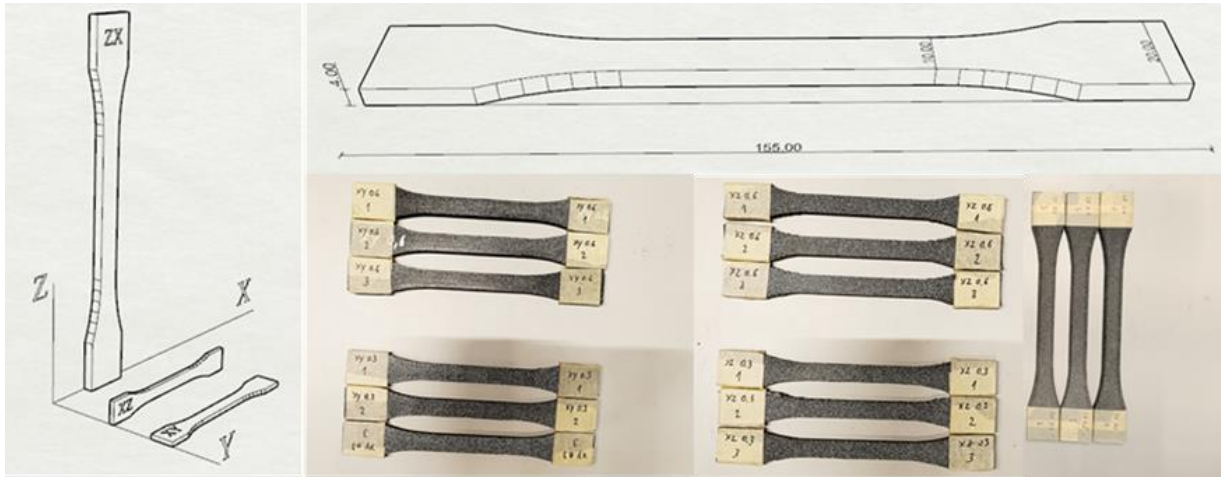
Tensile test specimens - HI_TEMP CF material
